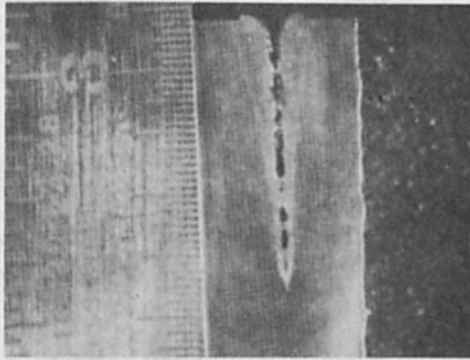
Cross section of a weld (150 kv, 10 ma, 0 ipm) on 6061 aluminum showing completed and pending closures of the cavity.<sup>3</sup>
